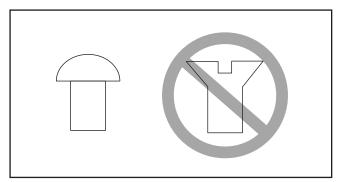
Correct and incorrect screw types for mounting faceplate to workpiece.
